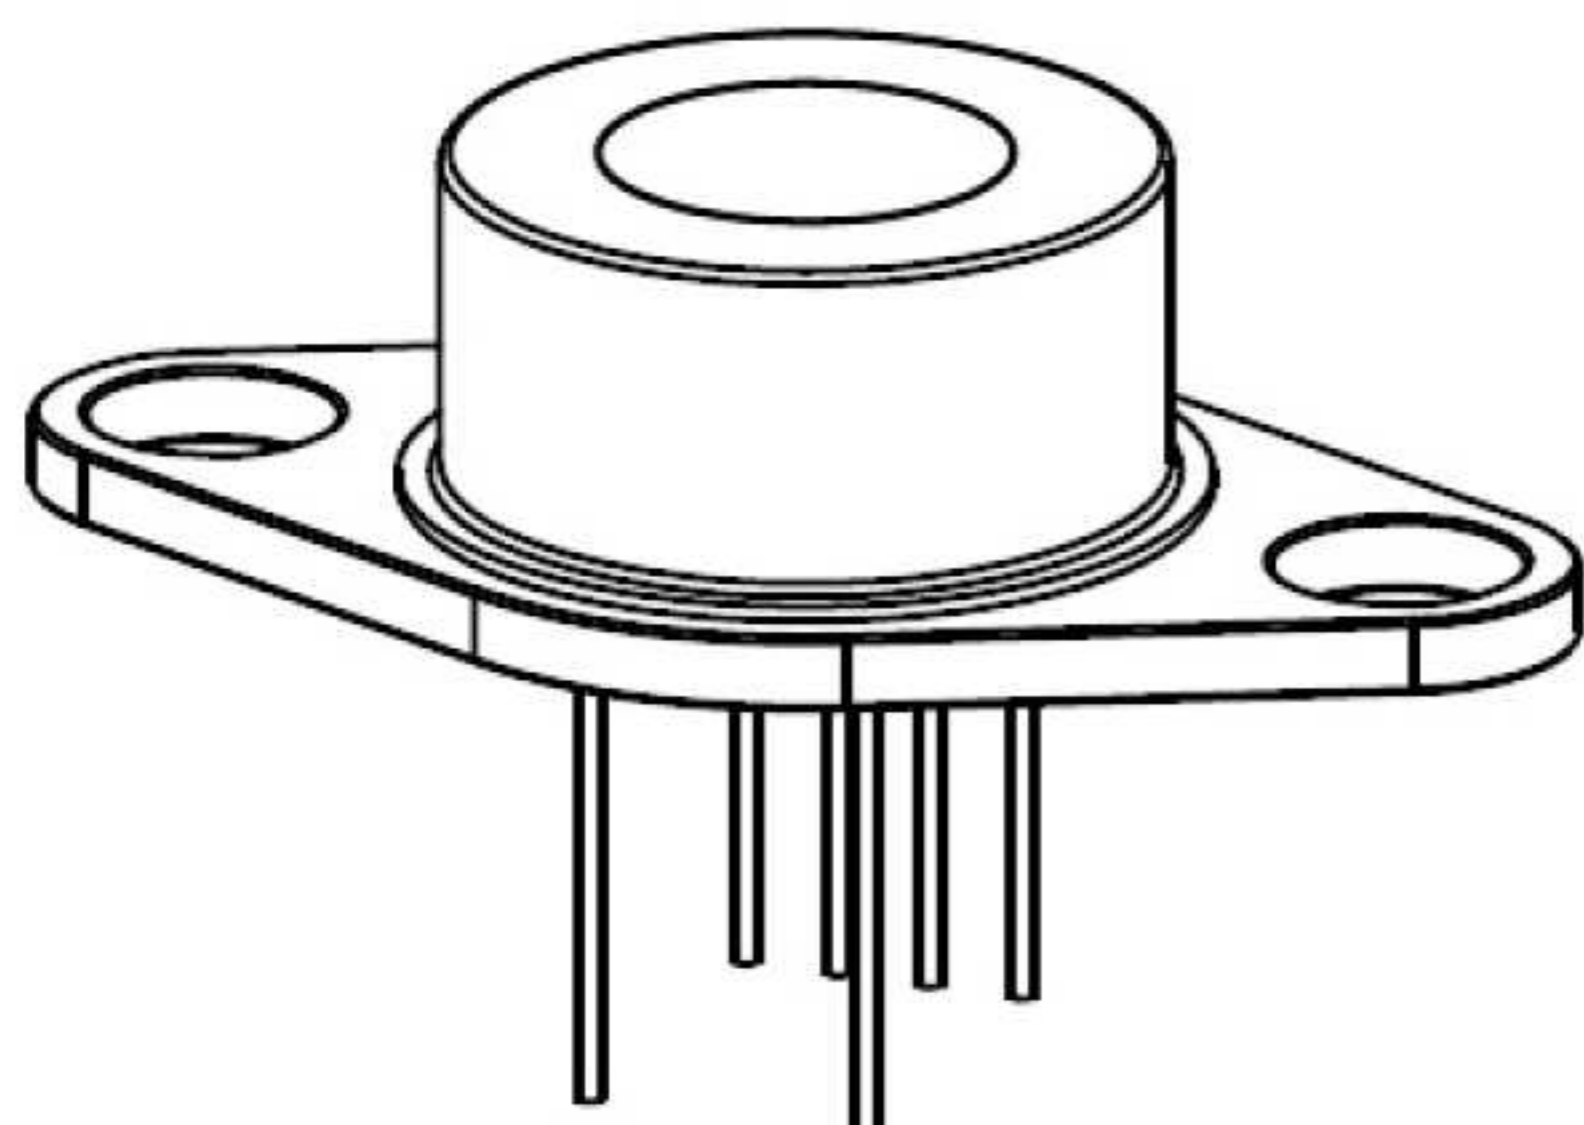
External Dimensions 2 (Unmarked dimension tolerance  $\pm 0.1$  mm)
